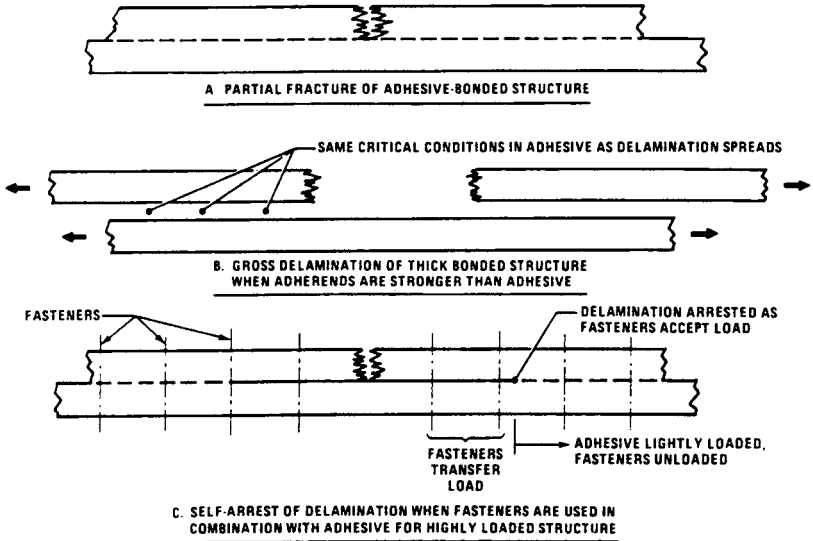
Load transfer through damaged (flawed) bonded joint reinforced by bolts.
